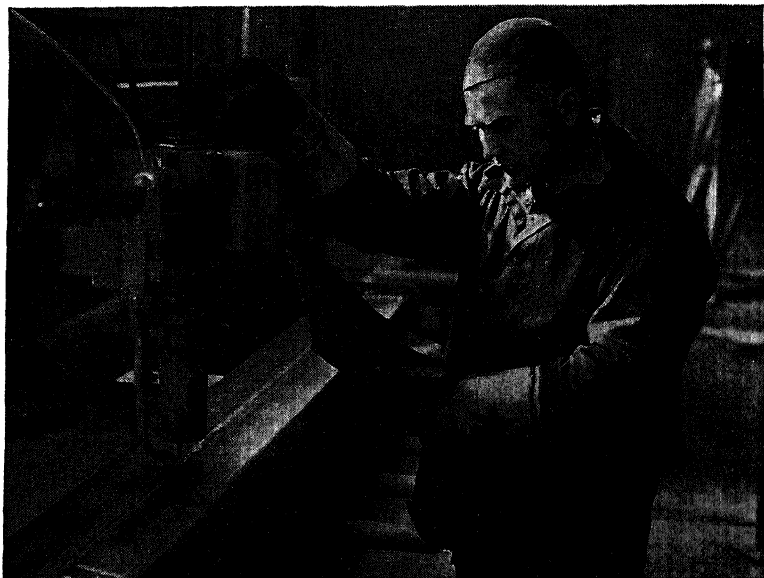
Manufacturing "Redler" conveyor casing by automatic carbon arc welding. This comprises two formed channels and a divider plate welded together.
